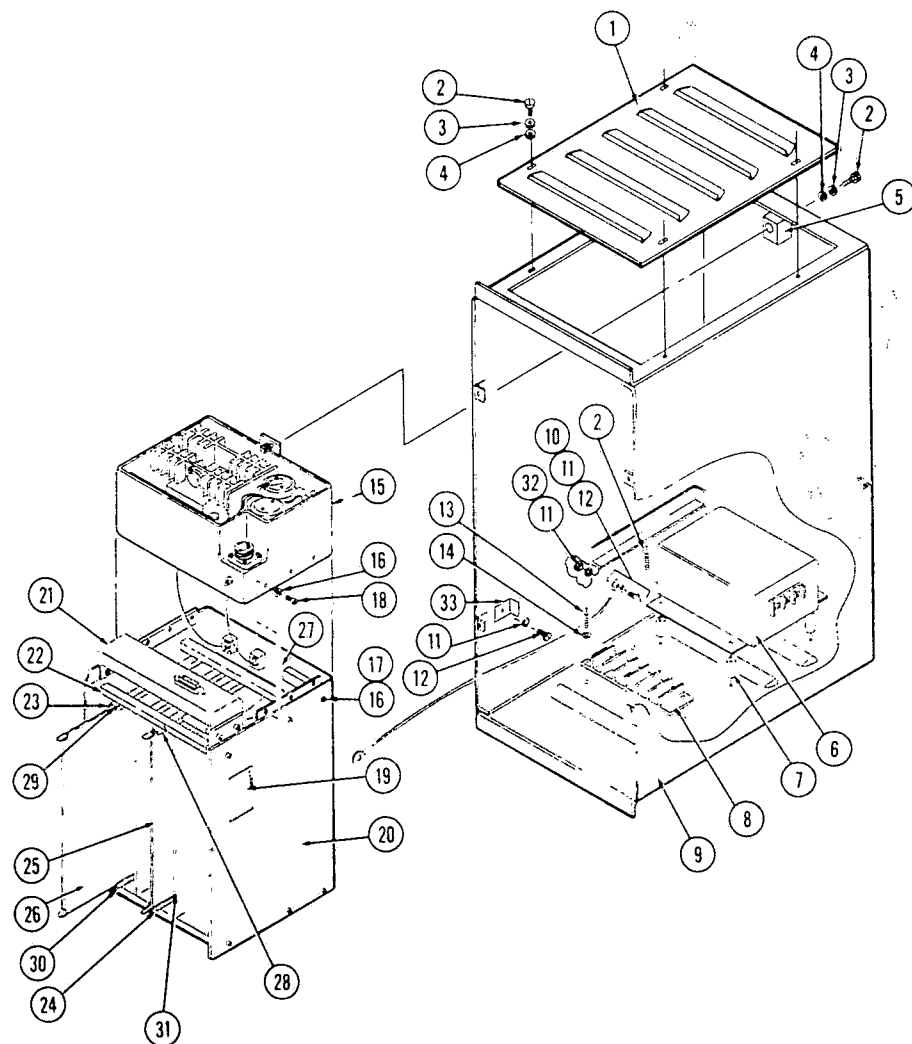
MAIN CONTROL AND BOX HOUSING ASSEMBLY.
